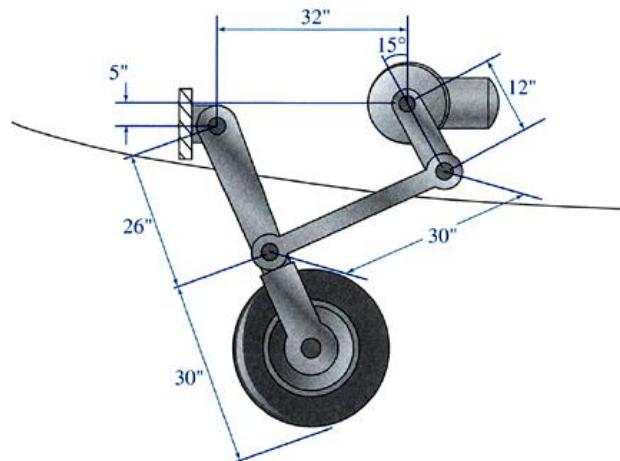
Nosewheel assembly for Example Problem 1.9.
